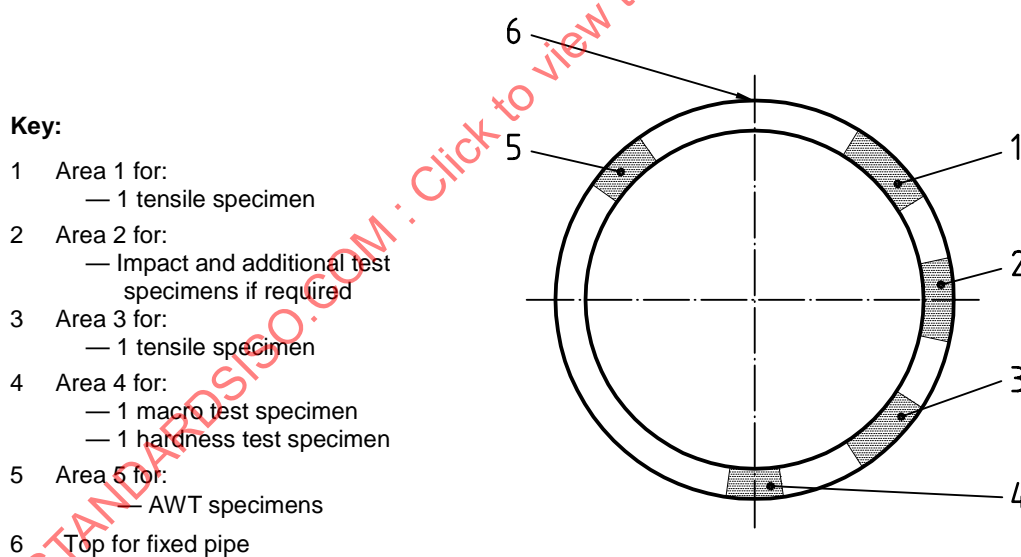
Location of test specimens for a fixed-position girth weld in pipe for upwards welding
